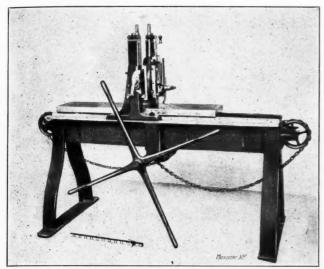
Roberts Planing Machine, Table 52 inches Long by 11 inches Wide (1817), South Kensington Museum
